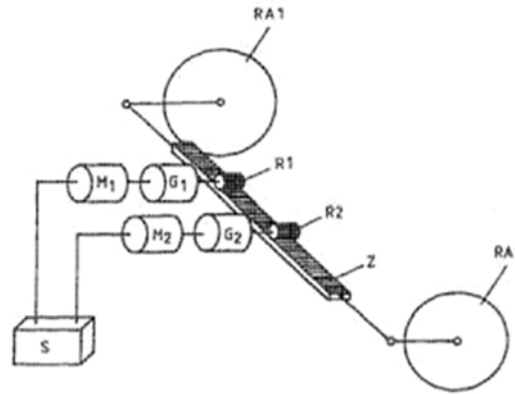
Method for actuating a steer-by-wire steering device [13]
